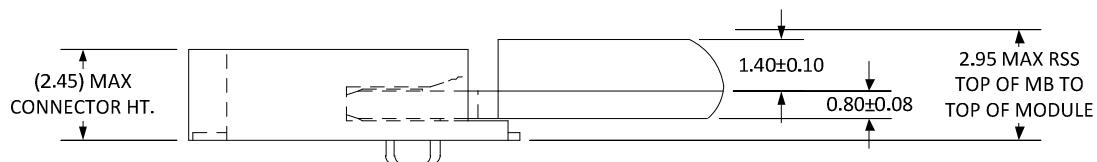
H2.5-S3 - Stack-up Top Mount Single-sided Module for 1.5 Maximum Top-side Component Height and with Higher Clearance above MB
